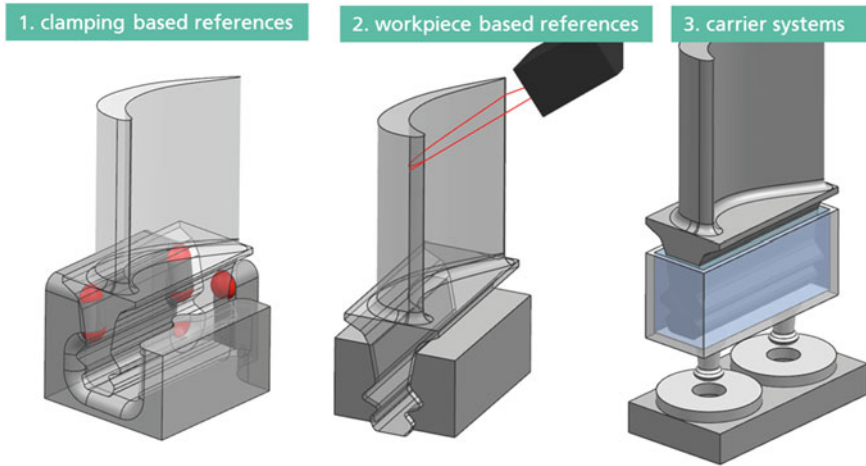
Three referencing strategies; *left* clamping based referencing by clearly determined workpiece positioning; *middle* workpiece based referencing using data acquisition; *right* carrier system using cast in workpieces combined with a zero point system
